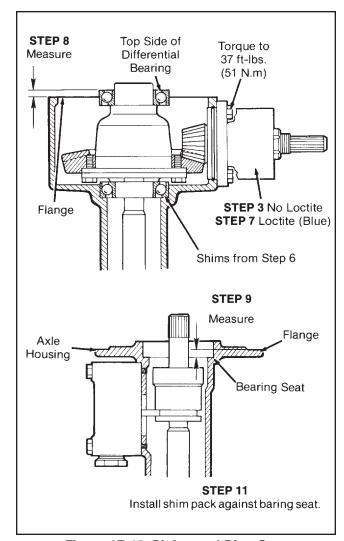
E-12. Pinion and Ring Gear Backlash Adjustment
